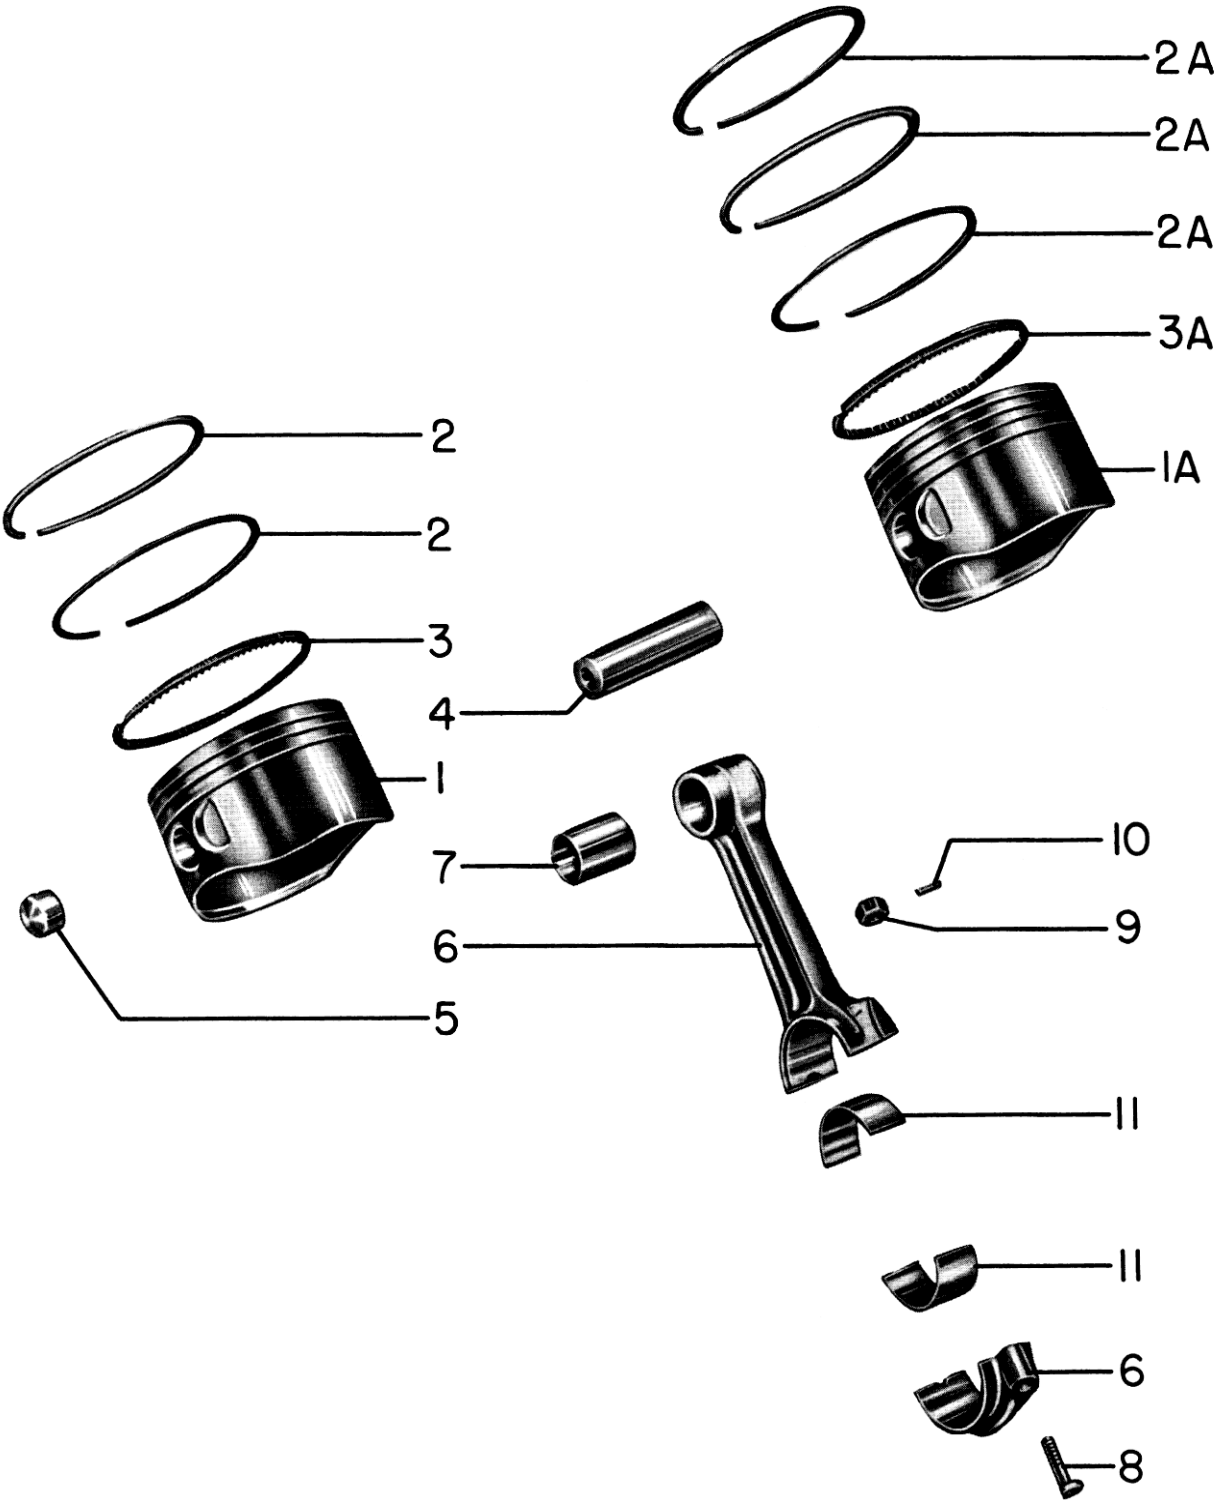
PISTON, PISTON RINGS AND CONNECTING ROD GROUP
